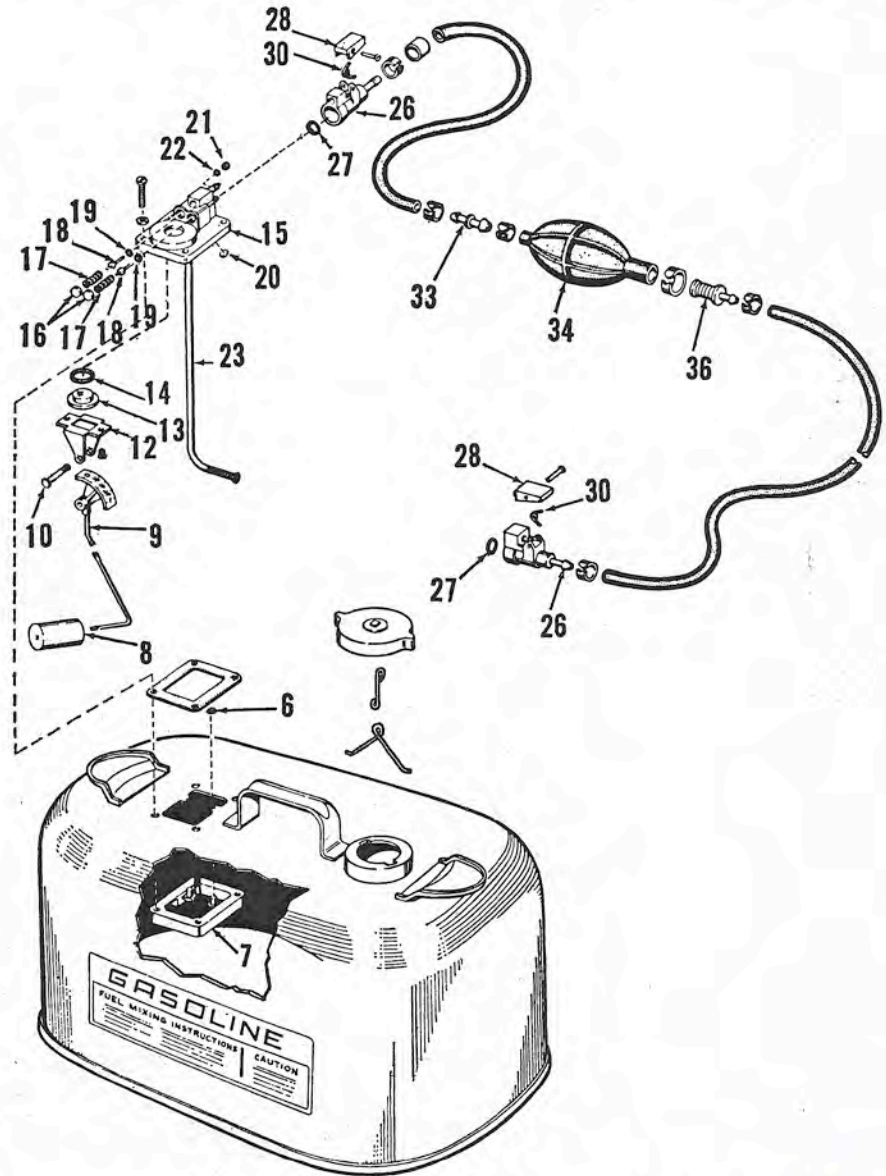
Exploded view of fuel tank assembly used on motors with diaphragm type fuel pump.
